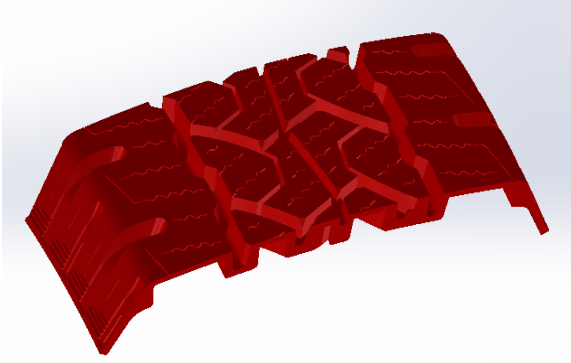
Schematic view of prototype tire tread pattern in the SolidWorks environment
